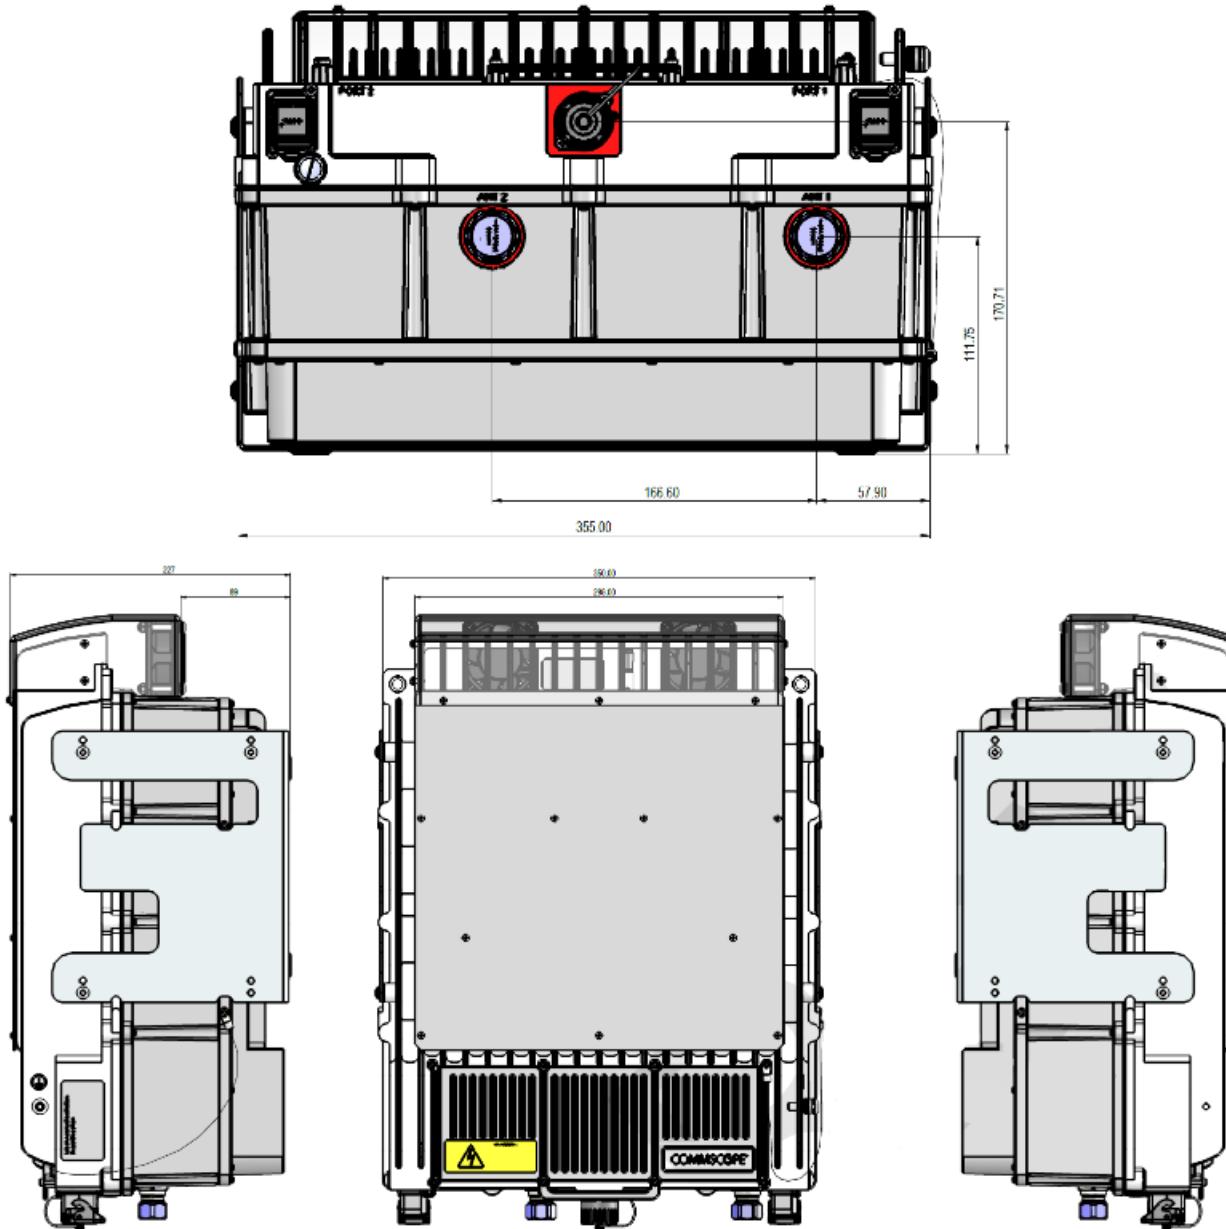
CAP M2 Mounting Dimensions (with fan unit / 4-port)
